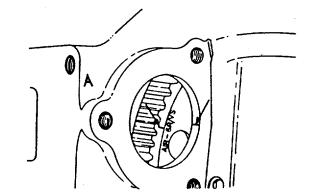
Flywheel/Adjustment Marks (Barring Device-Right Bank).
